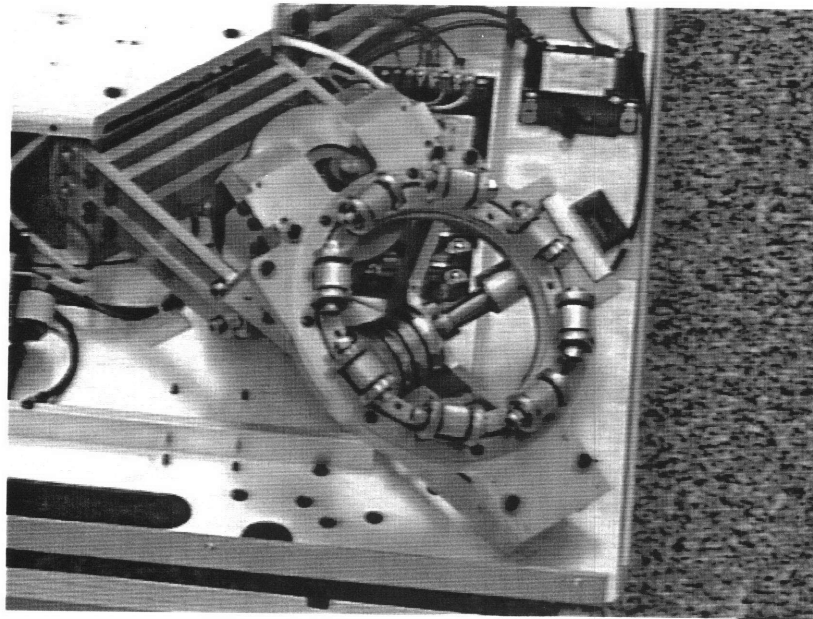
Ball Wheel Mechanism with Suspension
